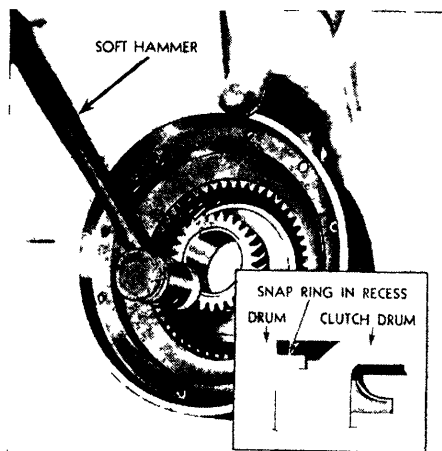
Tap front face of center gear so clutch drum will seat against snap ring
